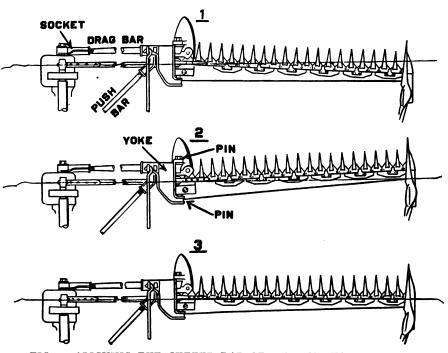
ALIGNING THE CUTTER BAR OF THE MOWING MACHINE
